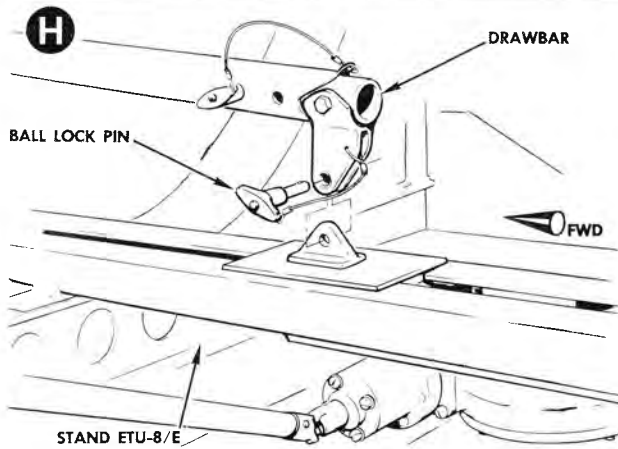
Engine Stand Preparation, Type USAF ETU-8/E Using Adapter Kit 8-96398 (Sheet 2 of 3)
